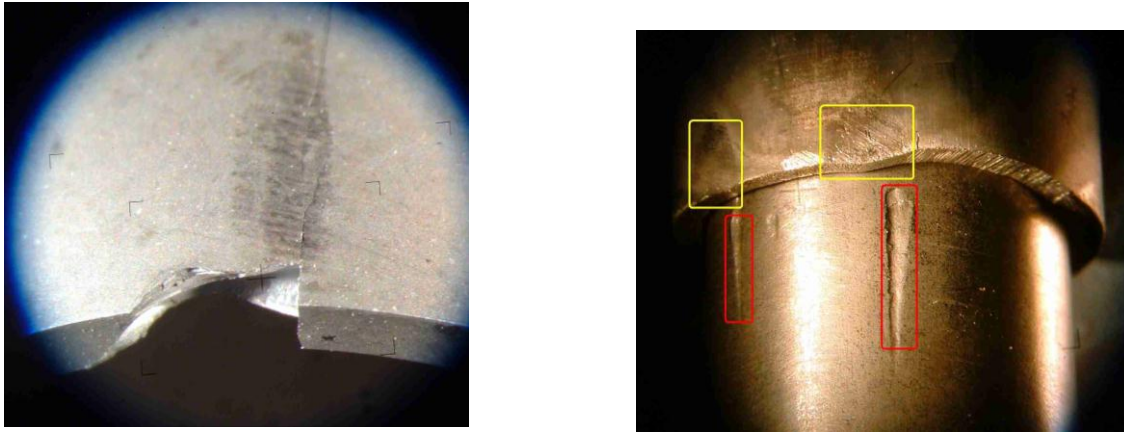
Left: Brittle cemented carbide bushes fracture after light impact. Right: Hardide-coated Inconel parts survived intense repeated hammer impacts without fracture or flaking.
